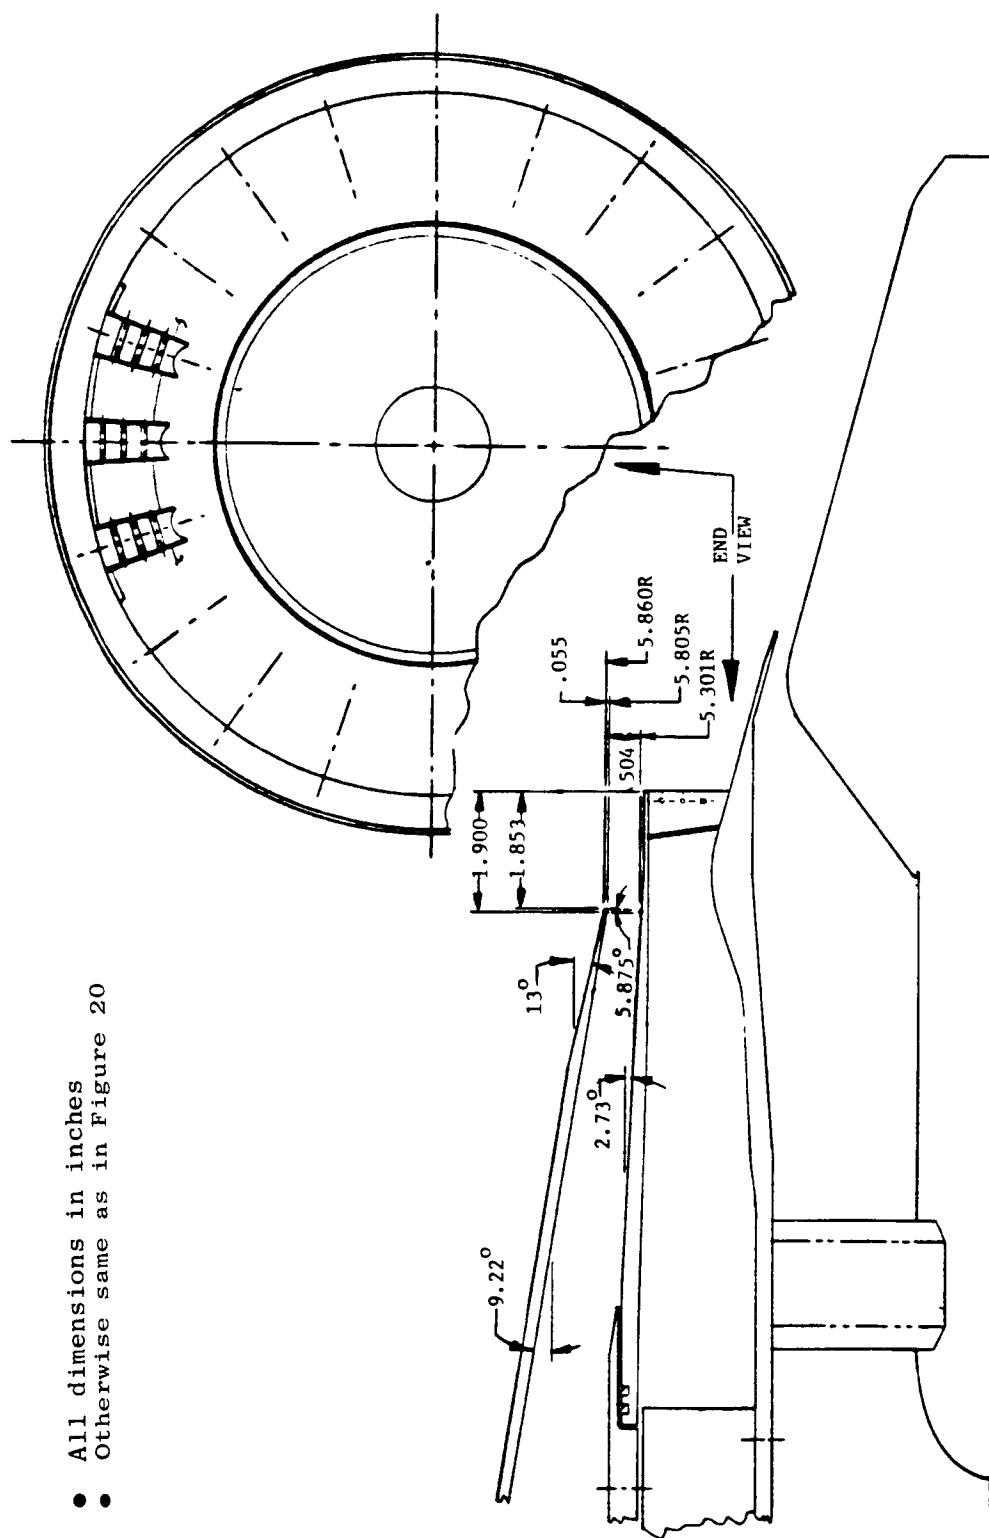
Schematic of Coannular Plug Nozzle with 20-Chute Outer-Stream Suppressor and 360° Shield, Configuration TAS-19.
